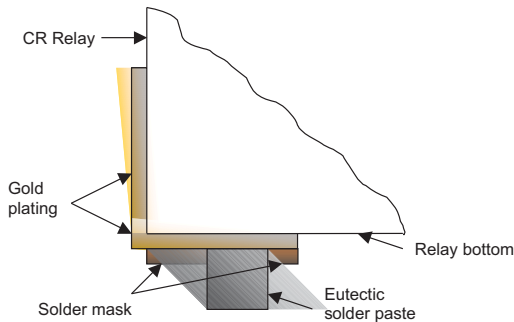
the solder paste volume present between the CR relay and the PCB before solder reflow.
